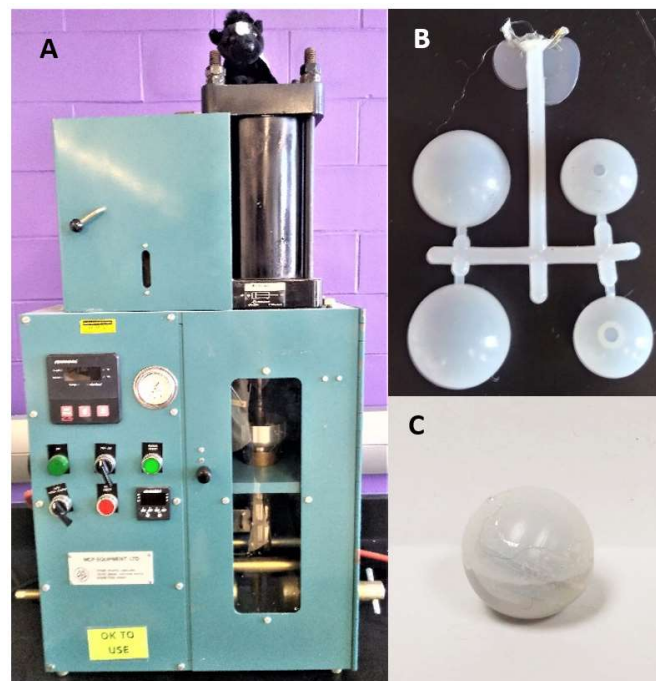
(A) Injection Molding Machine at WATiMake (B) Injection molded tree (C) Completed Wobblestone
